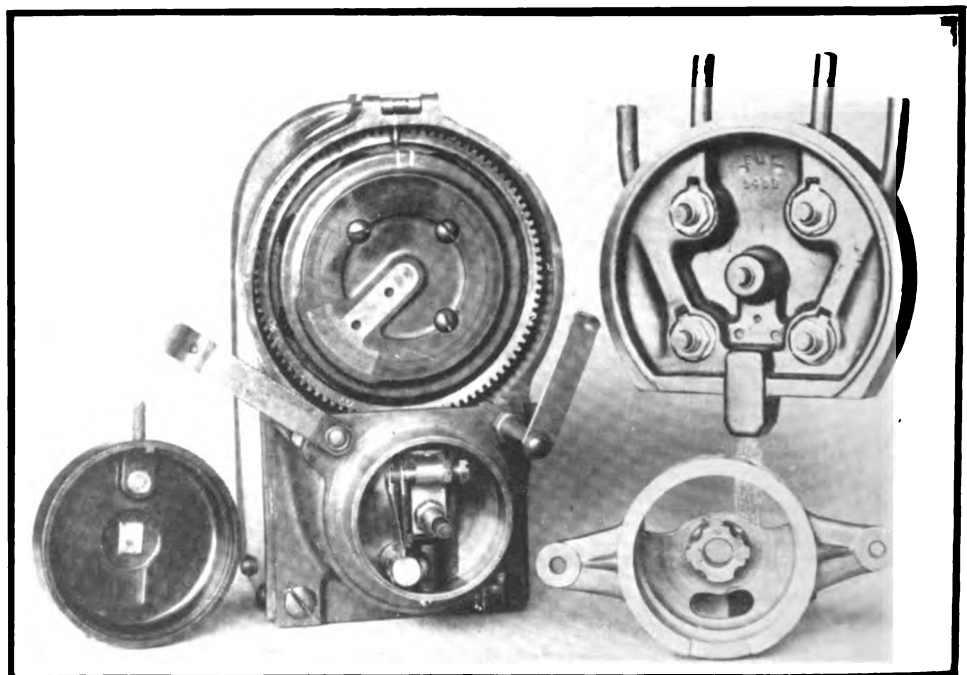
Eisemann Type G4 Magneto with End Cap, Timing Lever and Distributor Disc Displaced to Show Make and Break Mechanism and Method of Locking Cables.
